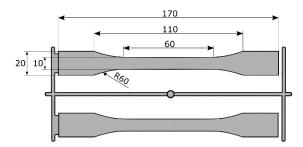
Geometry of the ISO 527-1/1B samples with dimensions. The thickness of the part is 4 mm.
